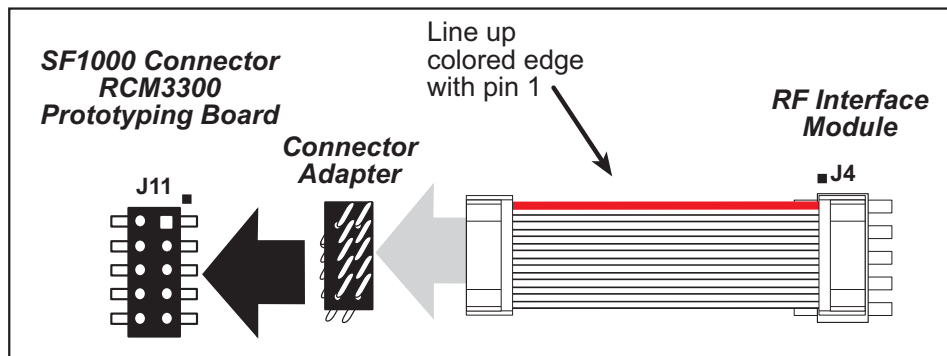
1.27 mm Serial Cable Connection Showing Use of Connector Adapter with SF1000 Header on RCM3300 Prototyping Board
